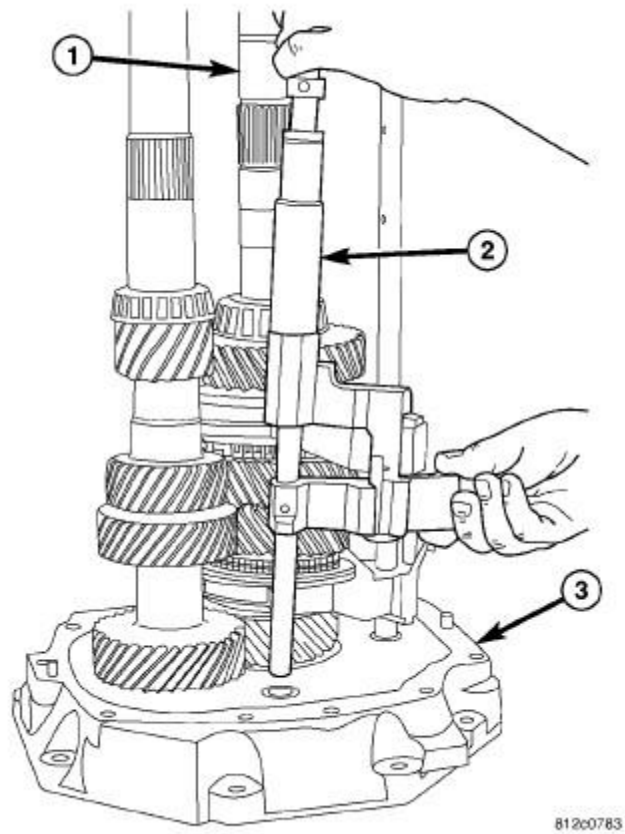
Removing/Installing Reverse Shaft Rail Assembly
